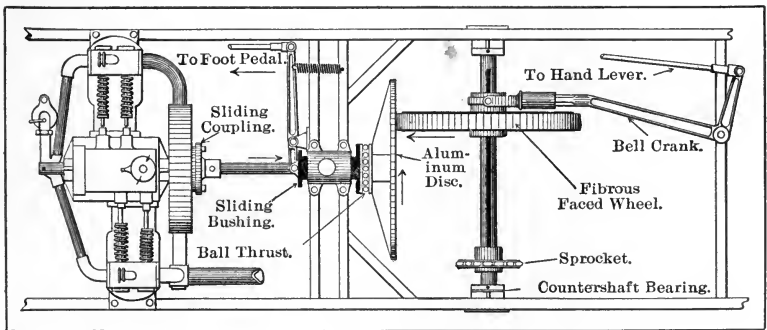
Disposition of Important Elements of Simple Face Friction Gearing Adapted for Single-Chain Drive.
